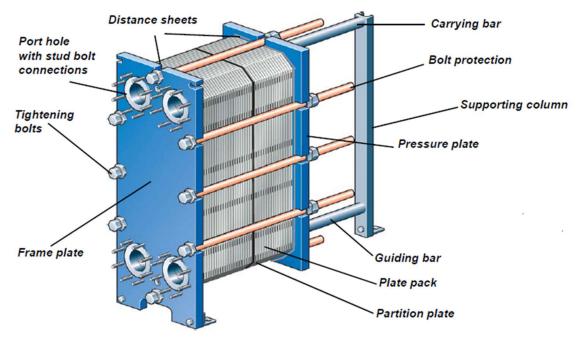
Semi-Welded Plate Heat Exchanger
